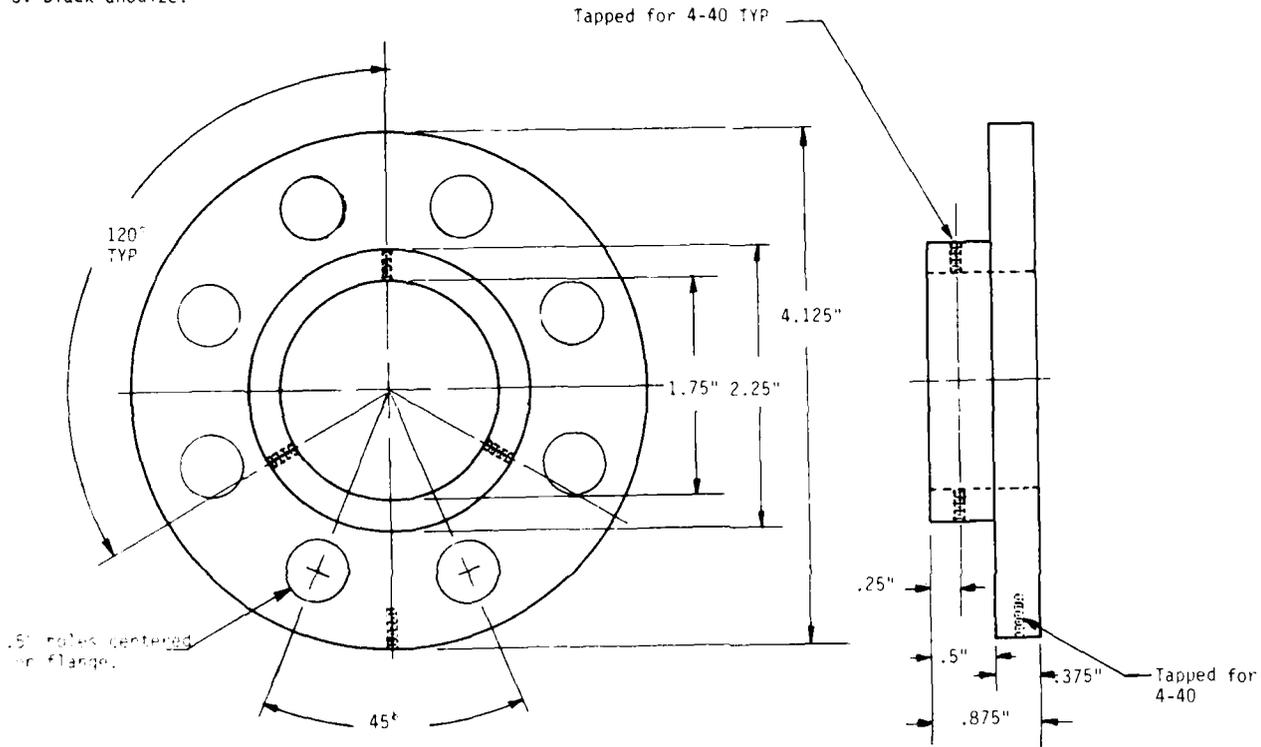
Laser collar mount; unless otherwise specified, tolerances are  $\pm .002$
